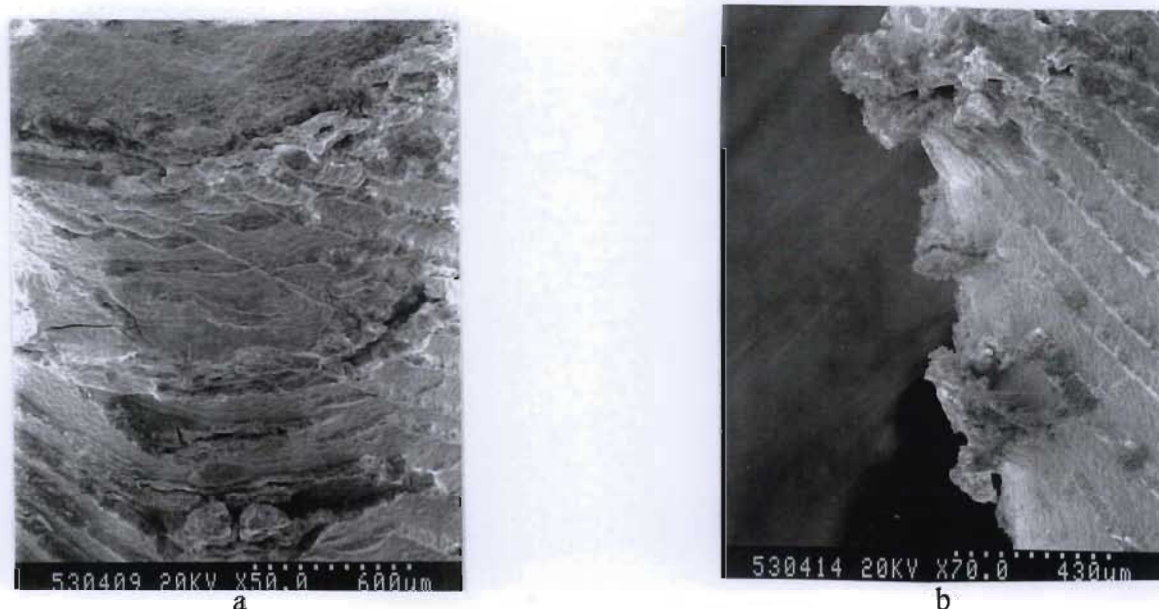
Cracking of TYPE II platinum aluminide coating close to the fracture surface due to HTLCF IN Ar + 5%SO₂ (S.R. 0.66%)
